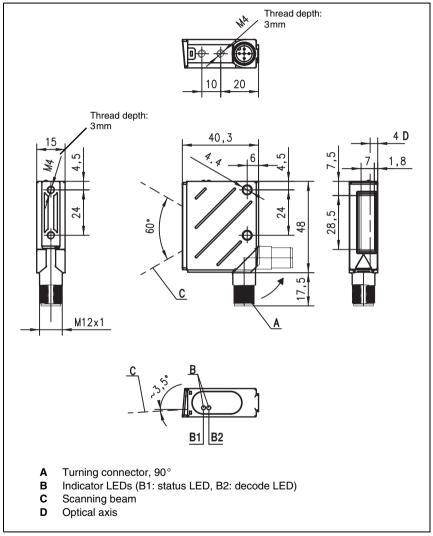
Dimensioned drawing BPS 8 SM 102-01
